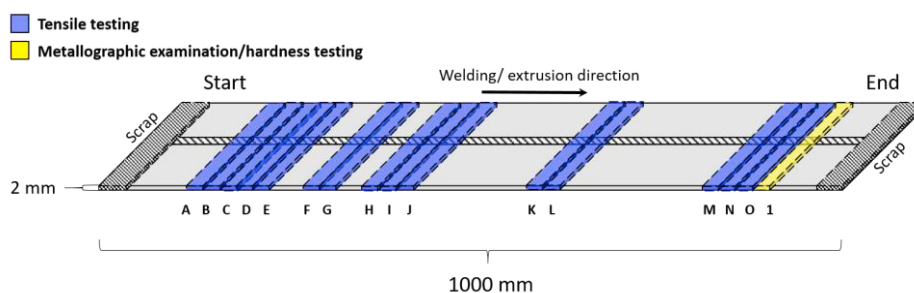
Sketch showing the location and labelling of the different specimens used for metallographic examination (yellow) and tensile testing (blue) referred to the start position of the weld.
